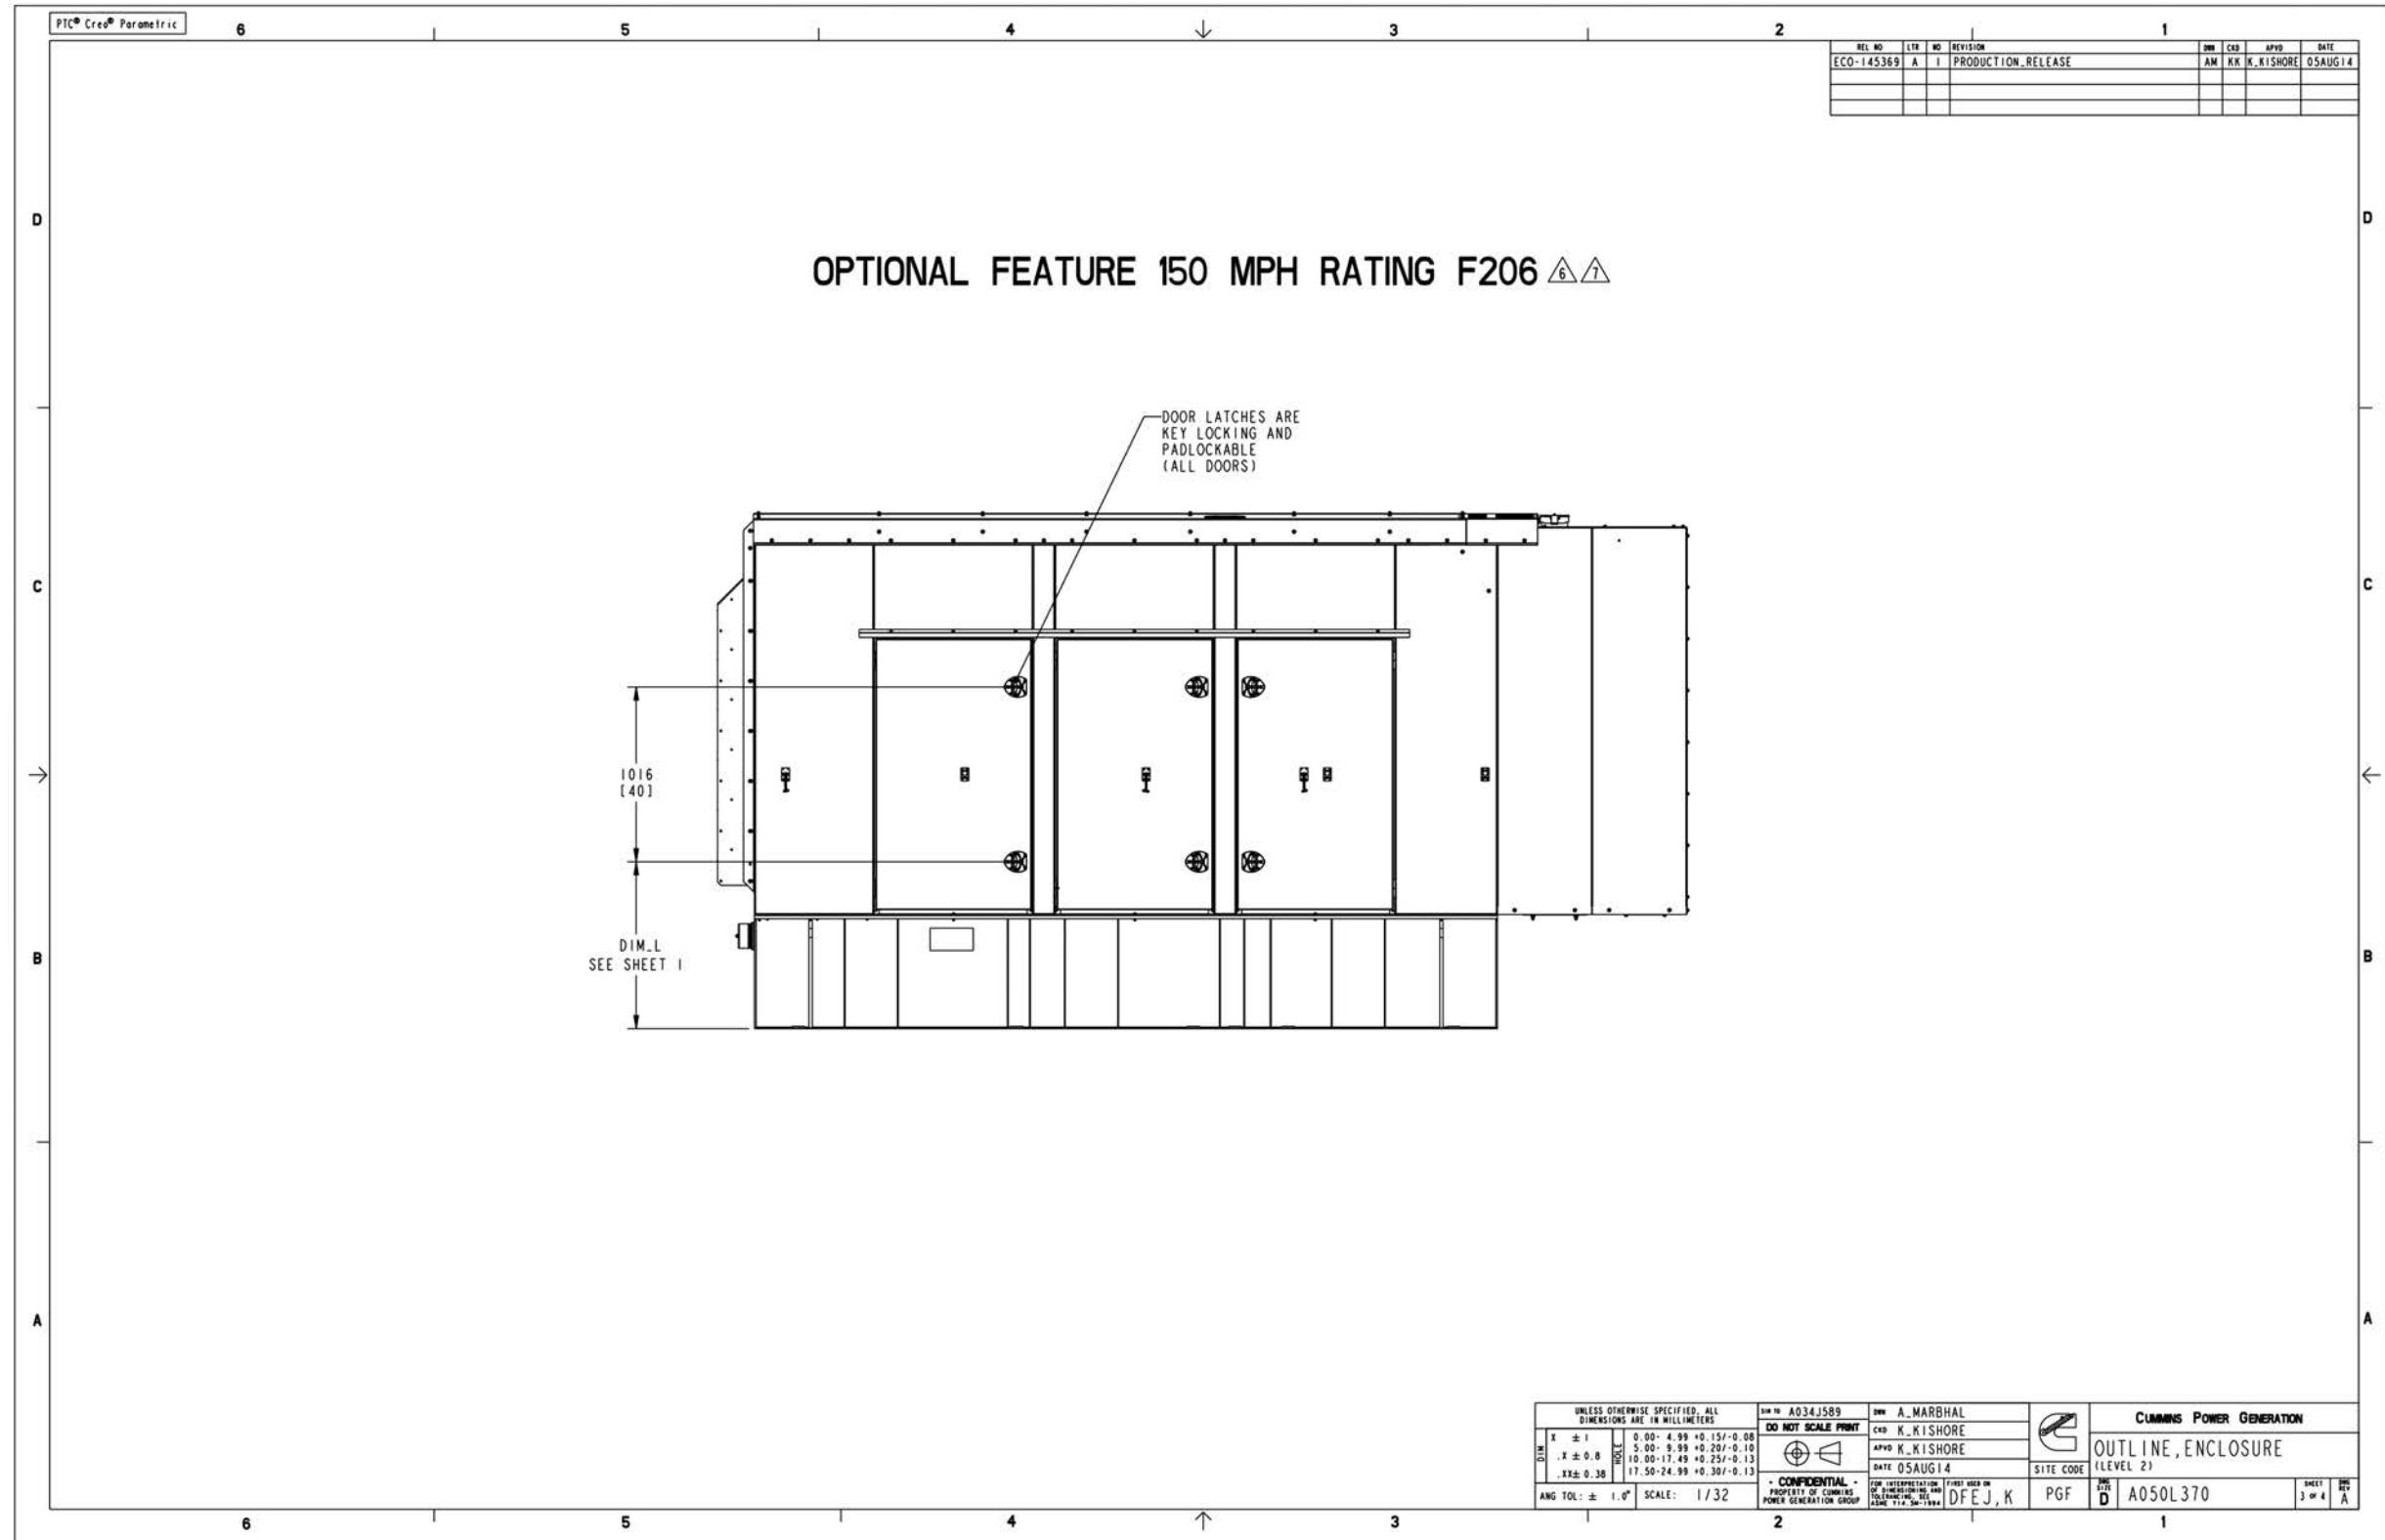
ENCLOSURE OUTLINE DRAWING (F202, F205, F206, F208, F209) (SHEET 3)
